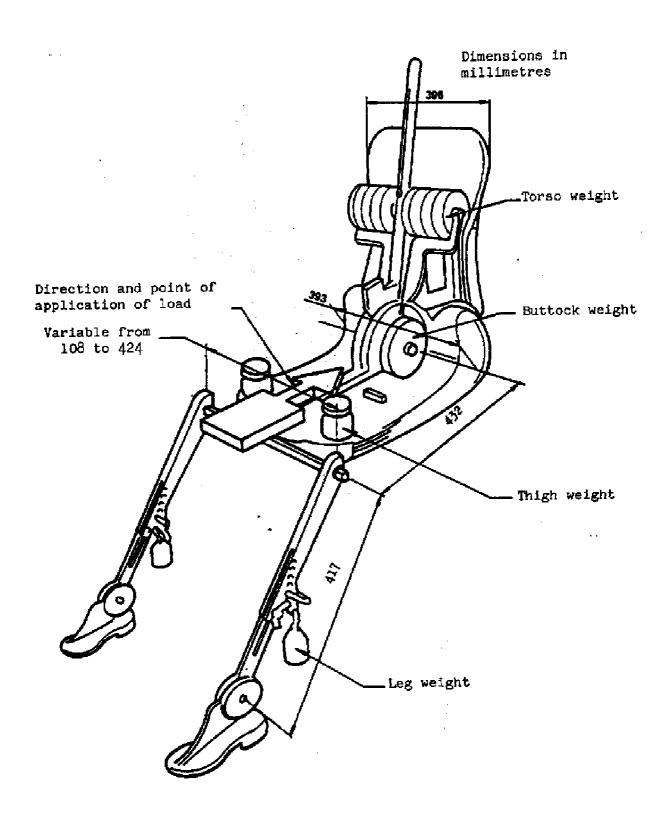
Dimensions of the 3-D H machine elements and load distribution
